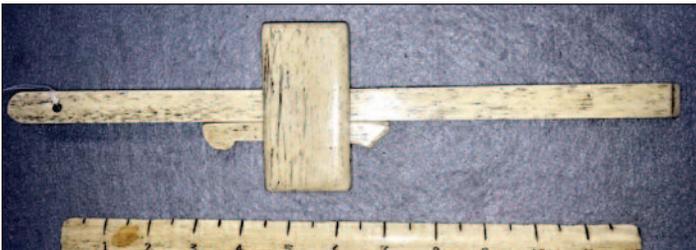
Wedge-lock marking gage. A panbone wedge shares the head mortise with the stem to lock it in place.
